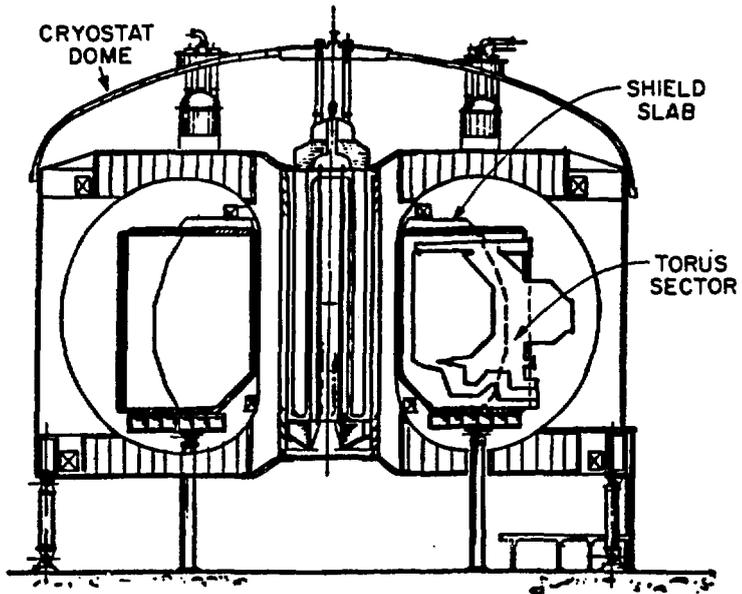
Initial assembly of the FED device — installation of torus sectors, shield slab, EF coils #1 & #4, cryostat dome.
